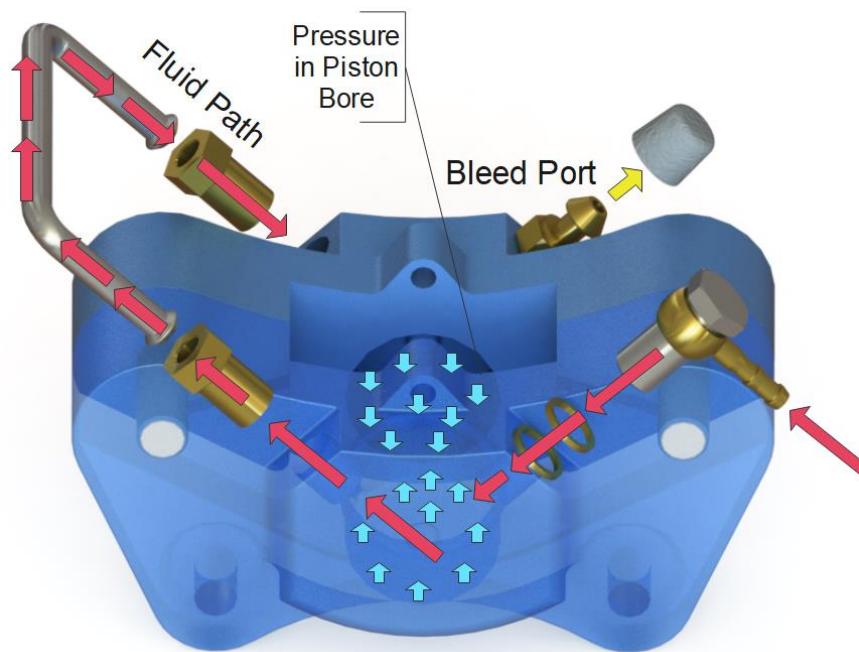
Calliper internal fluid passages - exploded detail view with arrows indicating fluid flow.
